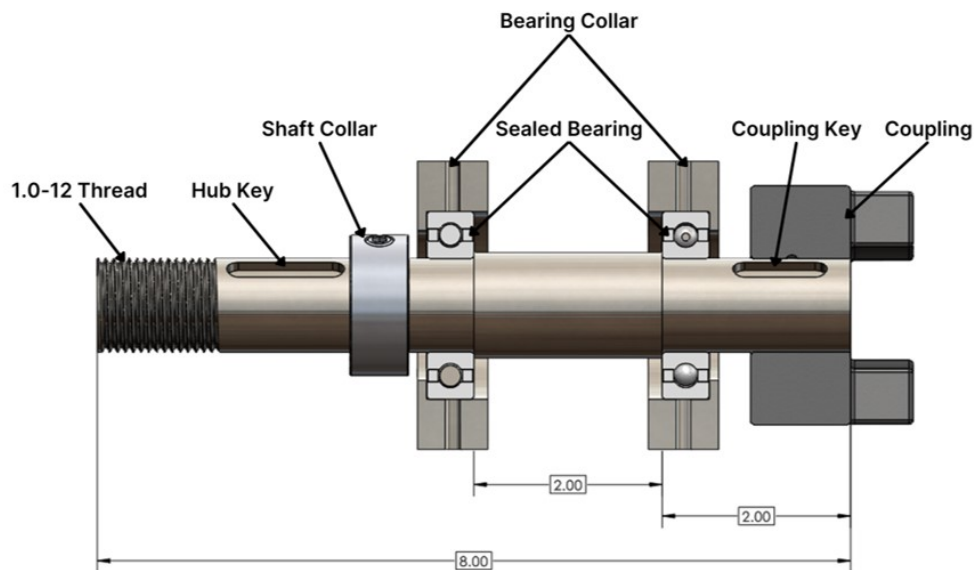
Partial cutaway of the shaft mechanism. Dimensions are in inches
